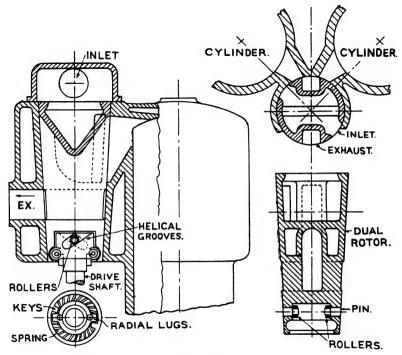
Russel dual valve arrangement. Single rotor feeding and exhausting two cylinders in turn.
